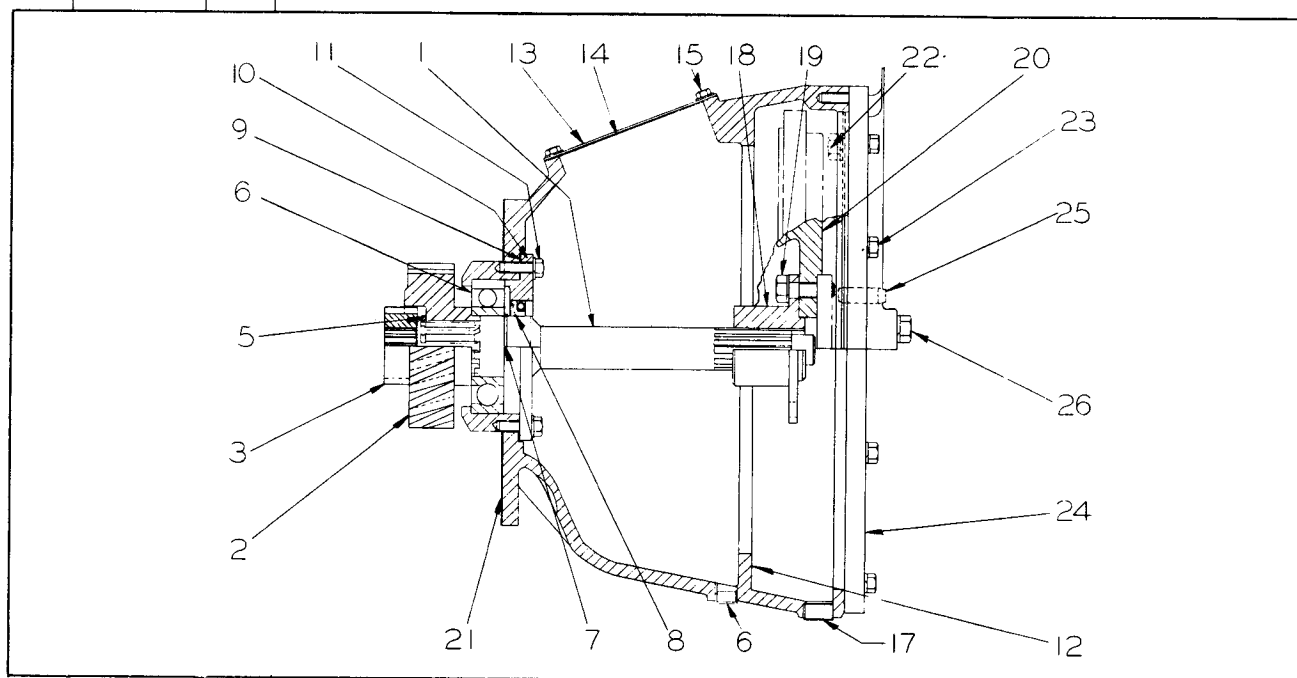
MECHANICAL DRIVE ASSEMBLY
